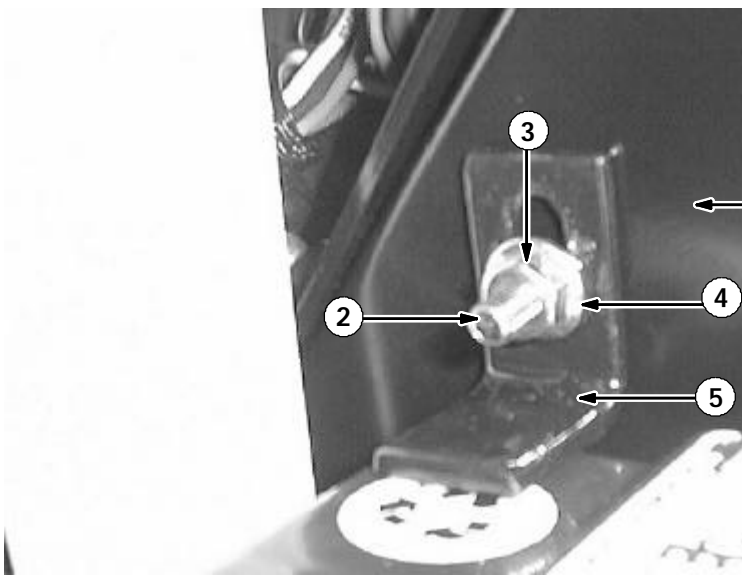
RIGHT SIDE COVER PANEL HOLE LOCATION
